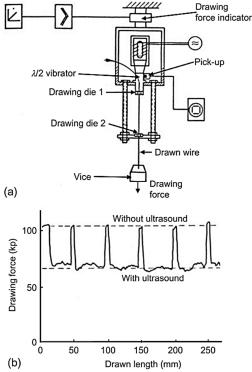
Wire drawing work. a- Experimental wire drawing setup and b-draw force on copper wire with on-off ultrasound [28] شكل 9 آزمون كشش سيم به كمك ارتعاشات فراصوت الف- نماى چيدمان كشش و
